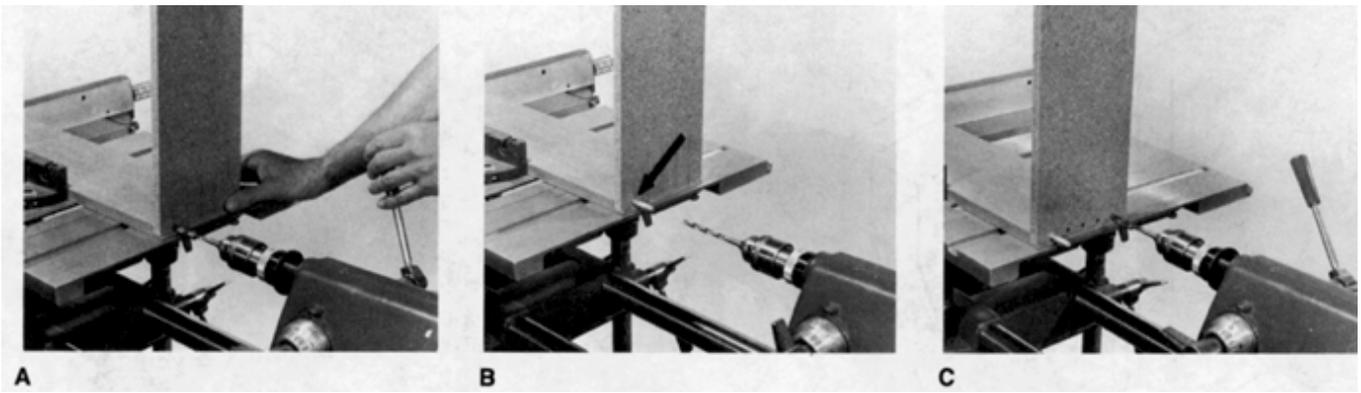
(A) When preparing to bore holes for the pegged joint, cut the side and front of the drawer side connections and position them. (B) Insert a dowel in the first hole so the pieces will be held in the correct position for the holes that follow. (C) Continue boring, controlling the depth of the holes with the depth control.
